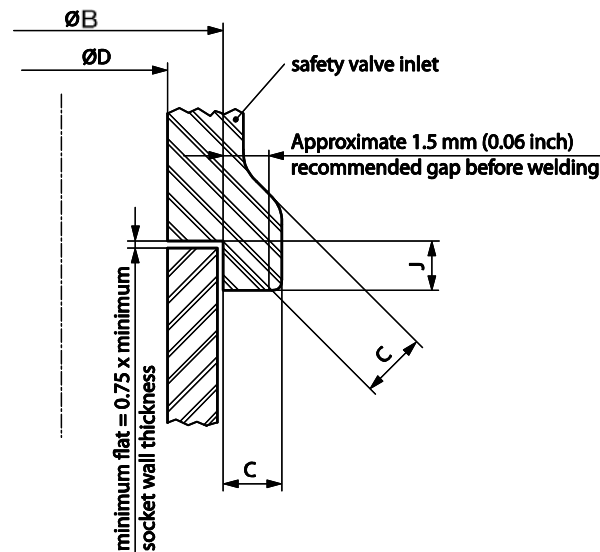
ASME B16.11 – welding gap and minimum flat dimensions for socket-welding fittings
